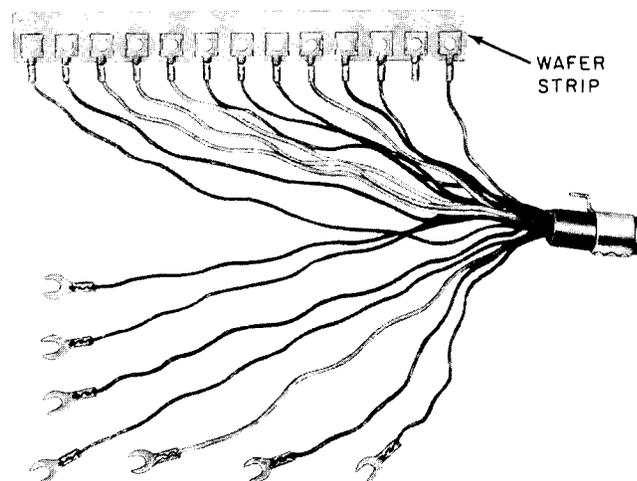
Nonslotted Wafer Strip End of Mounting Cord, Early Type
